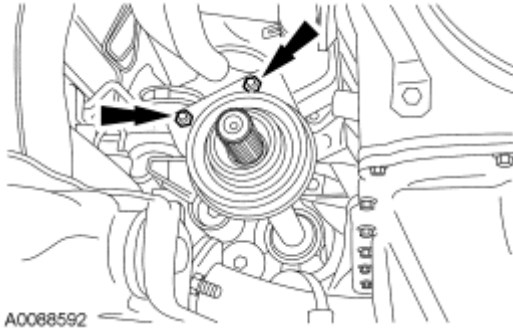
Locating Intermediate Shaft Retaining Nuts
